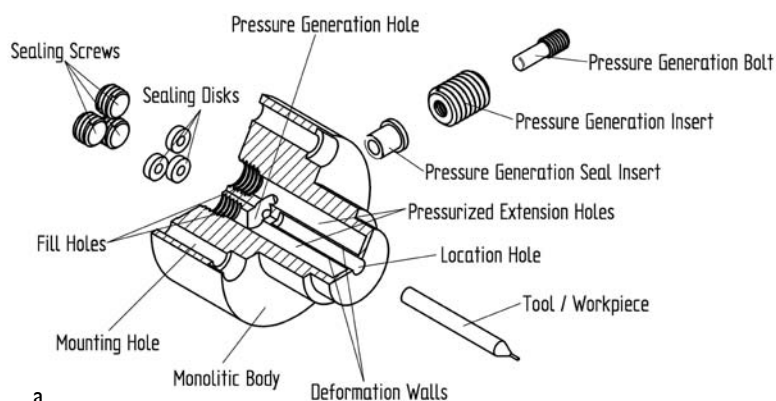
A monolithic hydraulic expansion device for clamping a tungsten carbide shank that is to be ground into a micro end mill. The device symmetrically compresses the shank to realise a rotational accuracy better than $0.2 \text{ }\mu\text{m}$.
